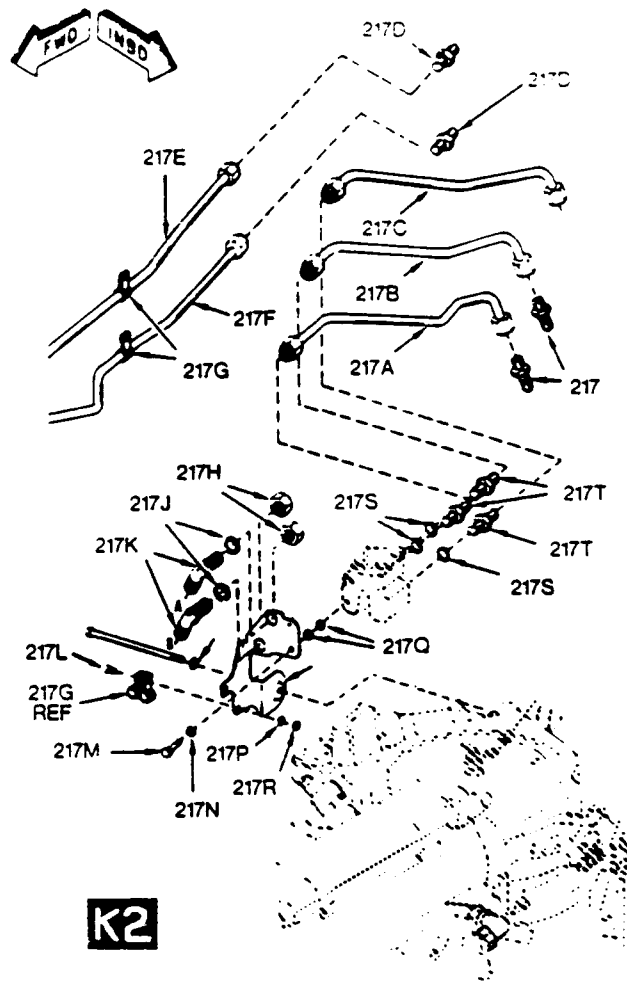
RH Aft Strut Assembly (Sheet 7 of 18)
